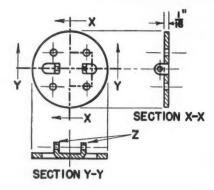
Drawing of a brass movement plate which is designed with two sheared and formed lugs Z. The movement plate is produced progressively, one plate per press stroke.
